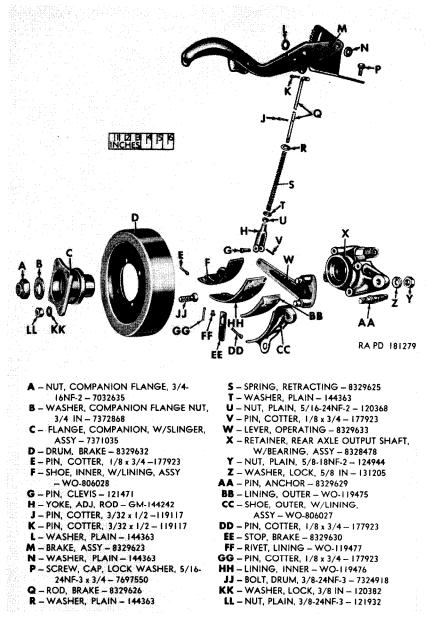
Handbrake assembly, drum and shoes—disassembled view.
